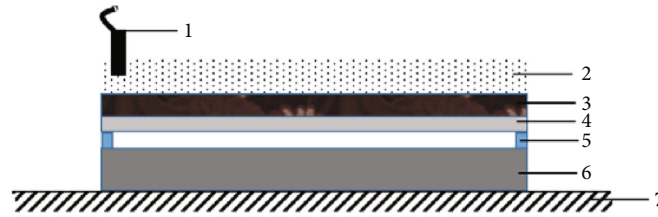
The sketch of explosive welding: (1) detonation, (2) explosives, (3) baffle, (4) R60702, (5) spacer, (6) Gr70, and (7) anvil.
